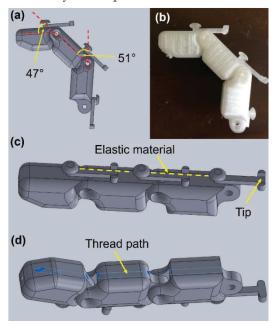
(a) CAD design of finger shows the finger flexion angle, (b) Fabricated finger, (c) CAD design of finger with elastic material fixtures, and (d) thread path
